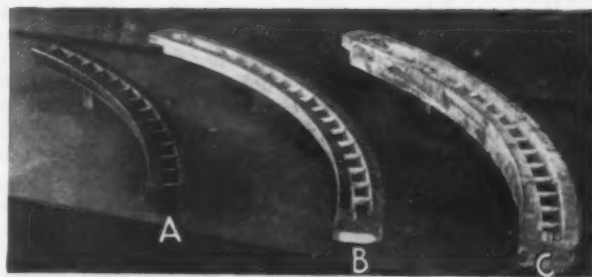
(Left)—Steam Exit Side of Second Stage Nozzle. A—Damaged nozzle section. B—Finished nozzle section before cutting to exact length. C—Rough casting with risers, etc., removed
